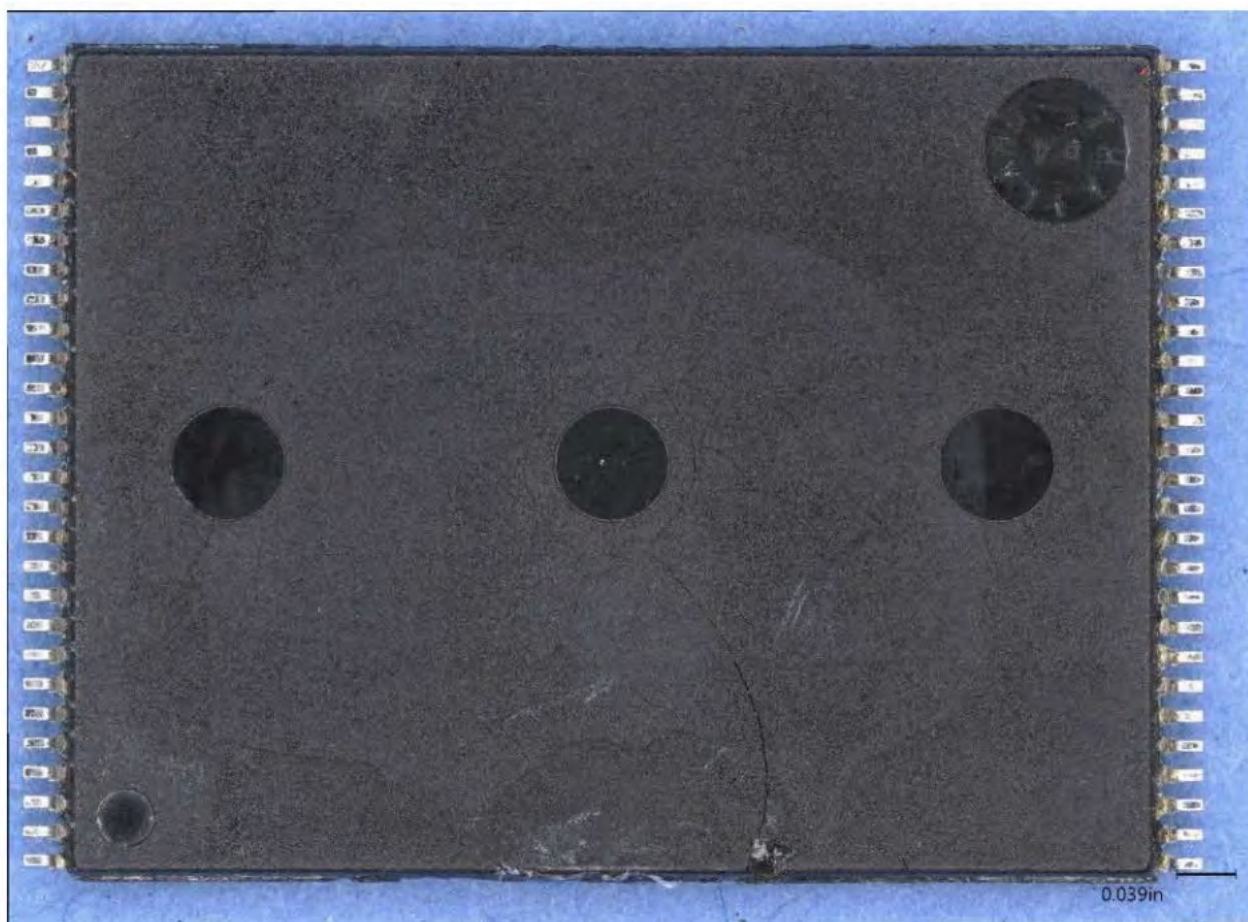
Bottom side of chip U2 showing cracks throughout chip packaging.
